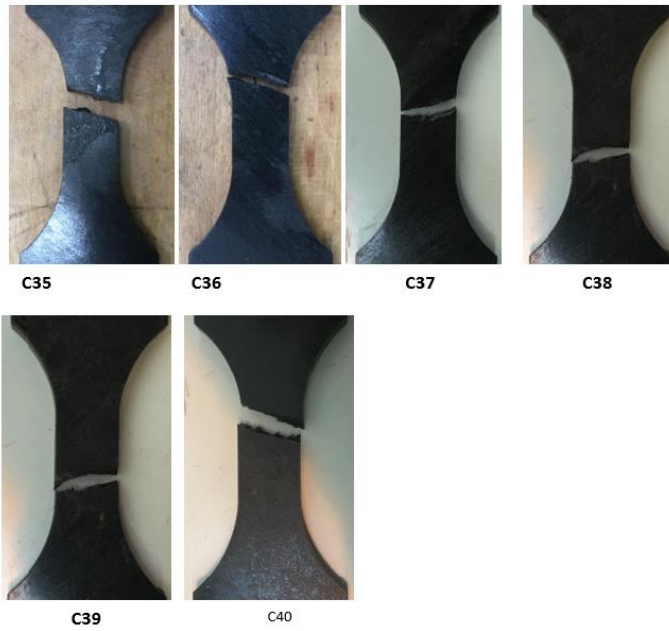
Fracture specimens for 45° coupons at R=0.3.
